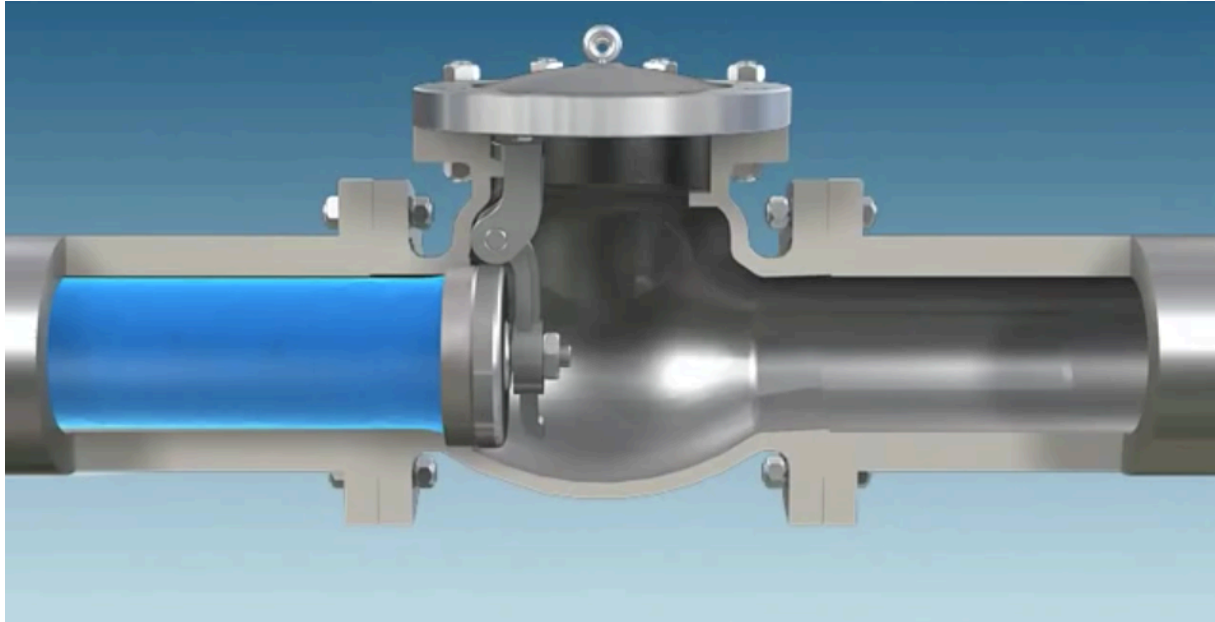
Swing Check Valve with zero/equal pressure on both sides. [14]
